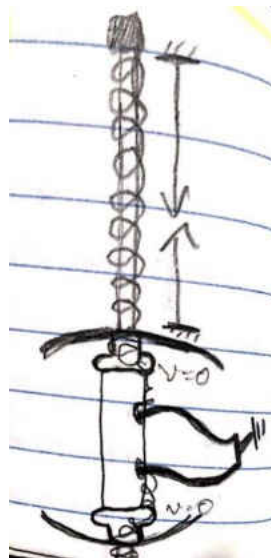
Assembly of SMA spring with diametric spoke and inner core.
